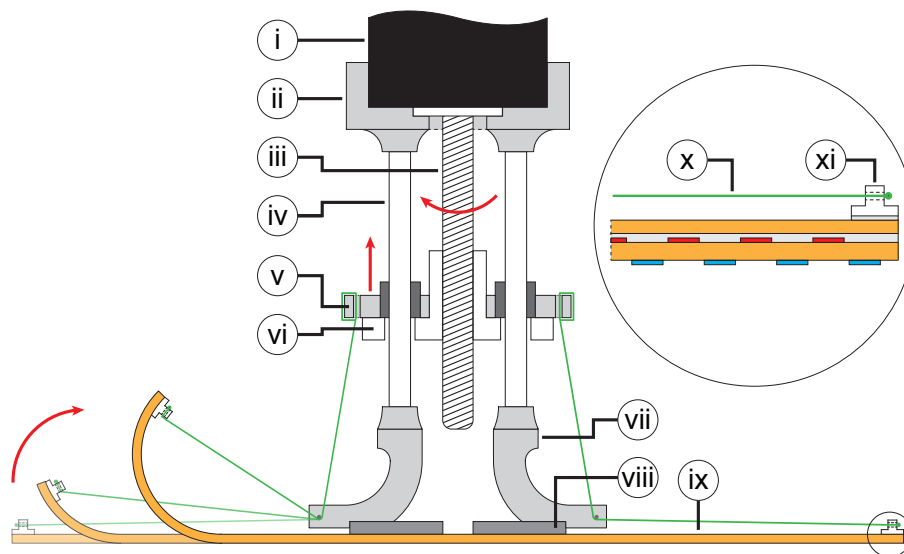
Assembled gripper with electrostatic adhesive attached to the gripper body (cross-section shown). Components include: NEMA 8 motor (i) with lead screw shaft (iii) and linear actuator nut (vi), dowel pins (iv), 3D-printed motor mount (ii) / tendon mount (v) / adhesive mount (vii) / tendon terminals (xi), foam spacer (viii), adhesive (ix), and tendon thread (x).
